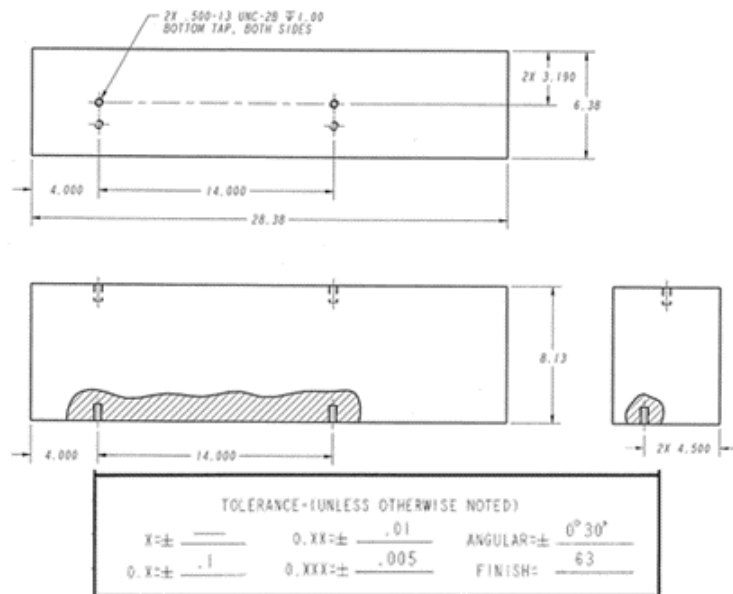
Engineering Drawing (128Y-270955-D3) of the Bottom Layer of Side Reflectors (Dimensions in Inches).
